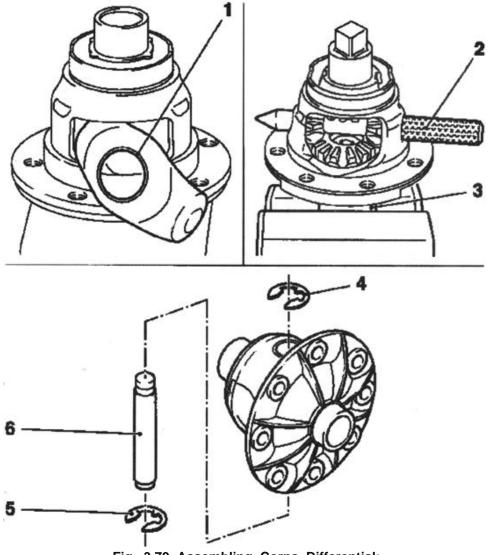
Assembling Corps Differential: 1 - Ring 2, 3 - a special tool; 4, 5 - retaining rings, 6 - cone axis
